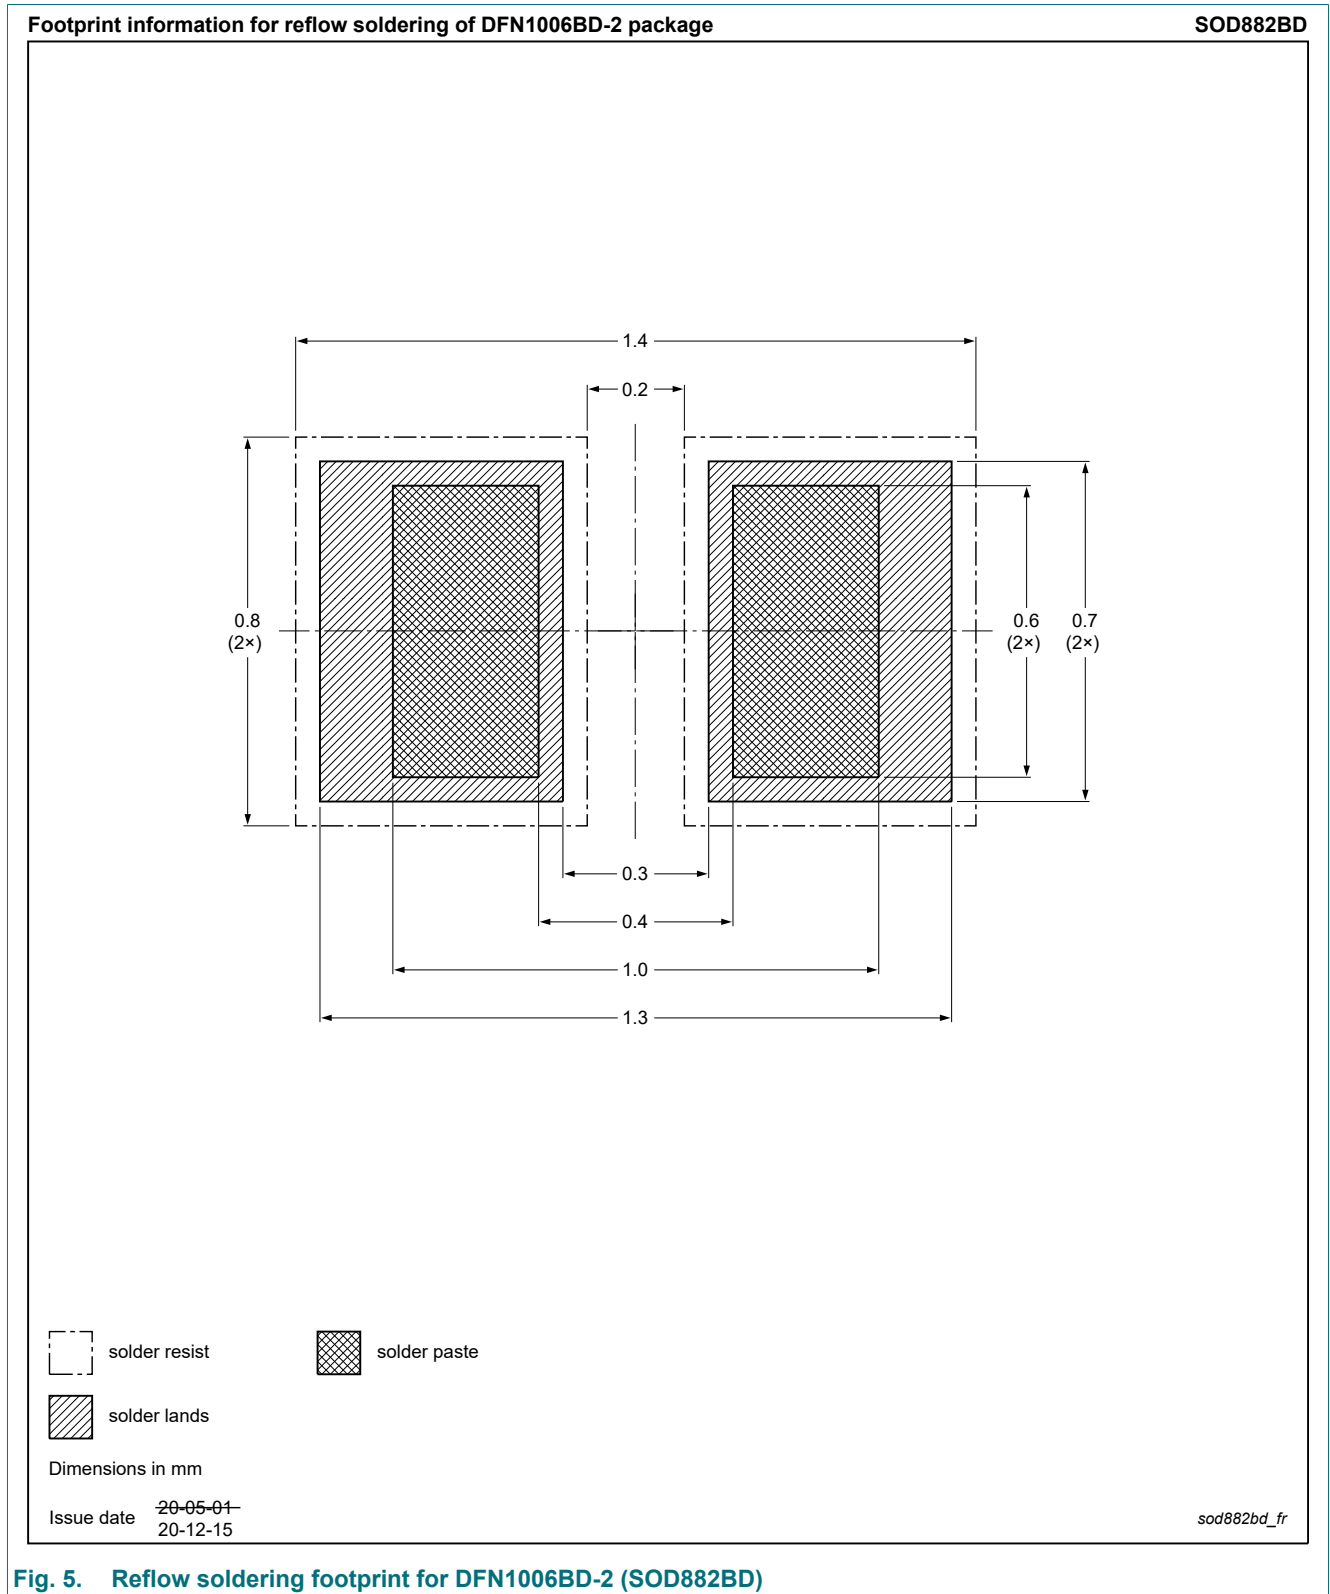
Reflow soldering footprint for DFN1006BD-2 (SOD882BD)
